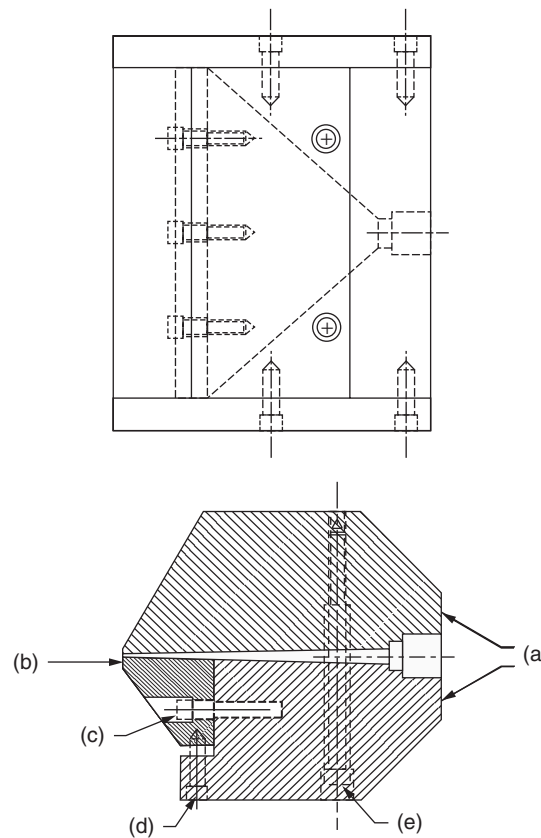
Manifold T-die: (a) Die body, (b) Manifold, (c) Adjusting lip, (d) Clamping screw.
